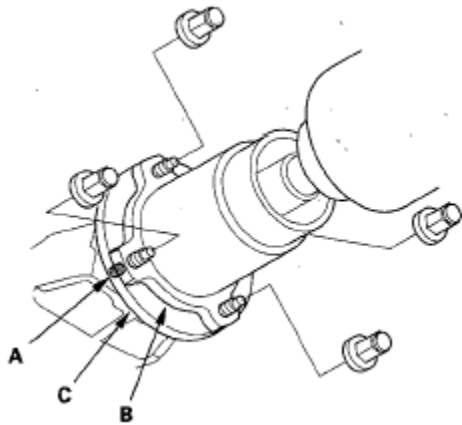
Identifying Reference Mark Across Propeller Shaft And Transfer Companion Flange
